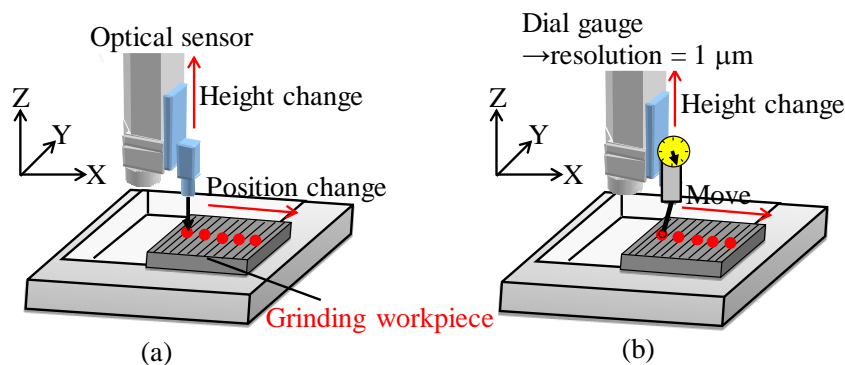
Experiment setup for deflection measurement of a metal workpiece compared with a dial gauge: (a) optical height displacement sensor setup and (b) dial gauge setup.
